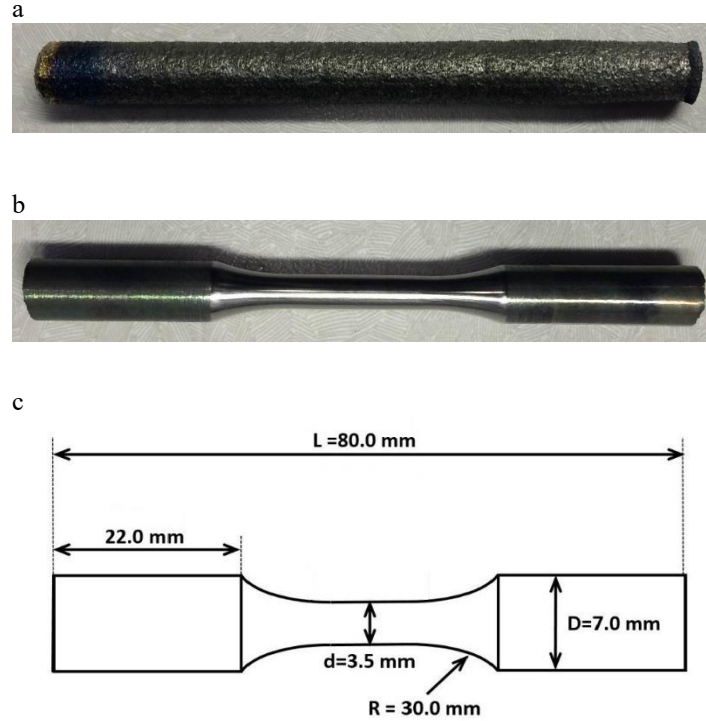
(a) As-Fabricated NiTi rod, (b) machined specimen, and (c) drawing of the fatigue specimen.
